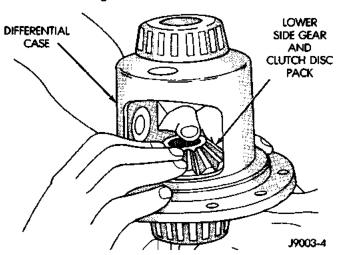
Clutch Discs and Ring Gear Side Gear installation
